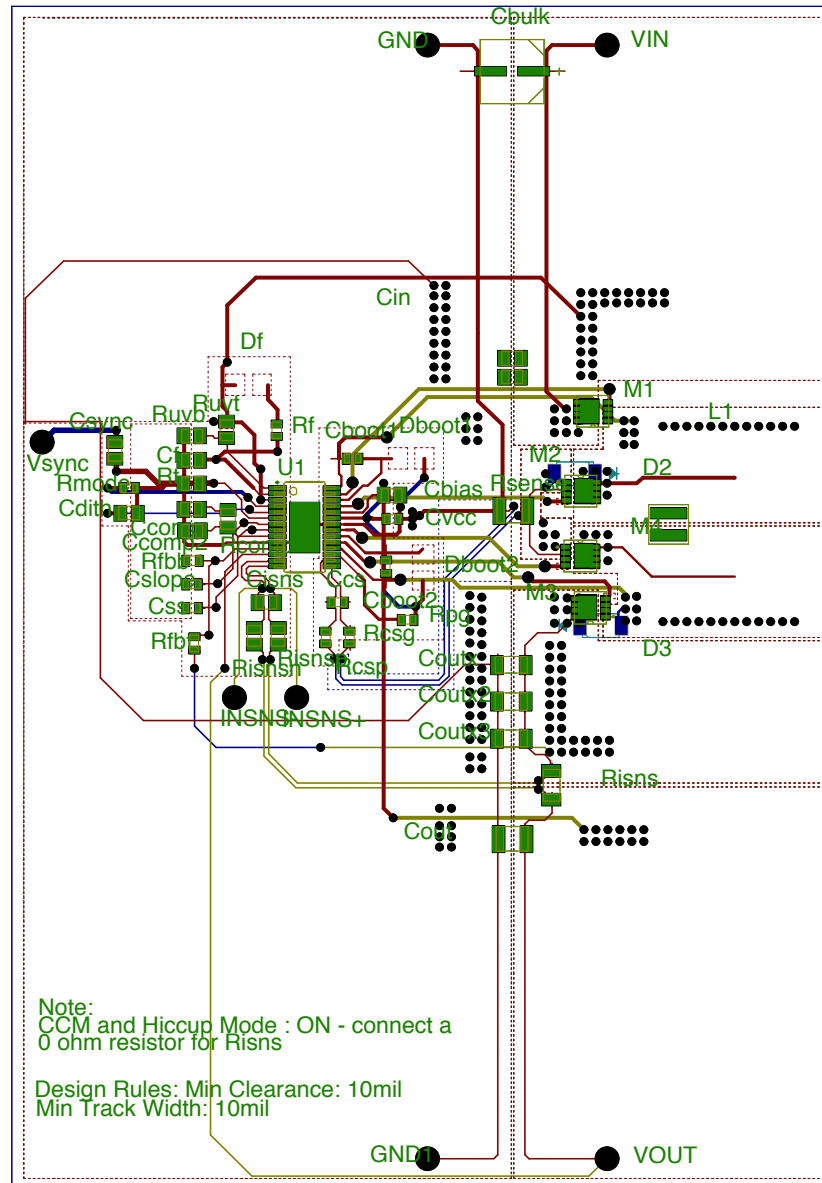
G-6.2: 5-Volt Power Supply PCB Board
